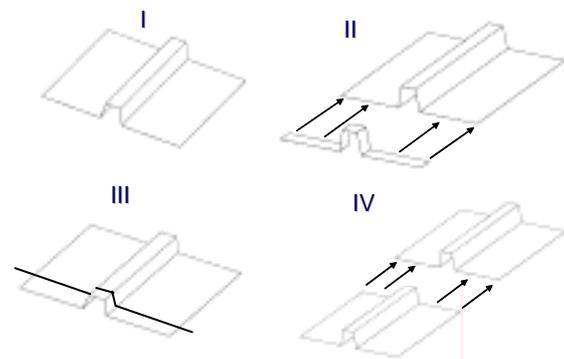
Proposed Flexible Floor Pan Design Alternatives
